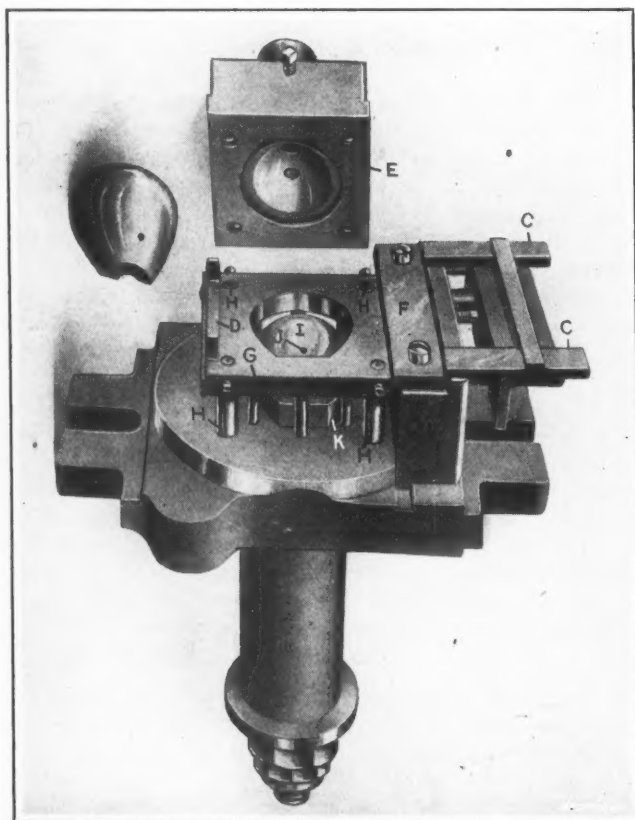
Upper and Lower Dies used for drawing Shells of Form shown at B, Fig. 1
